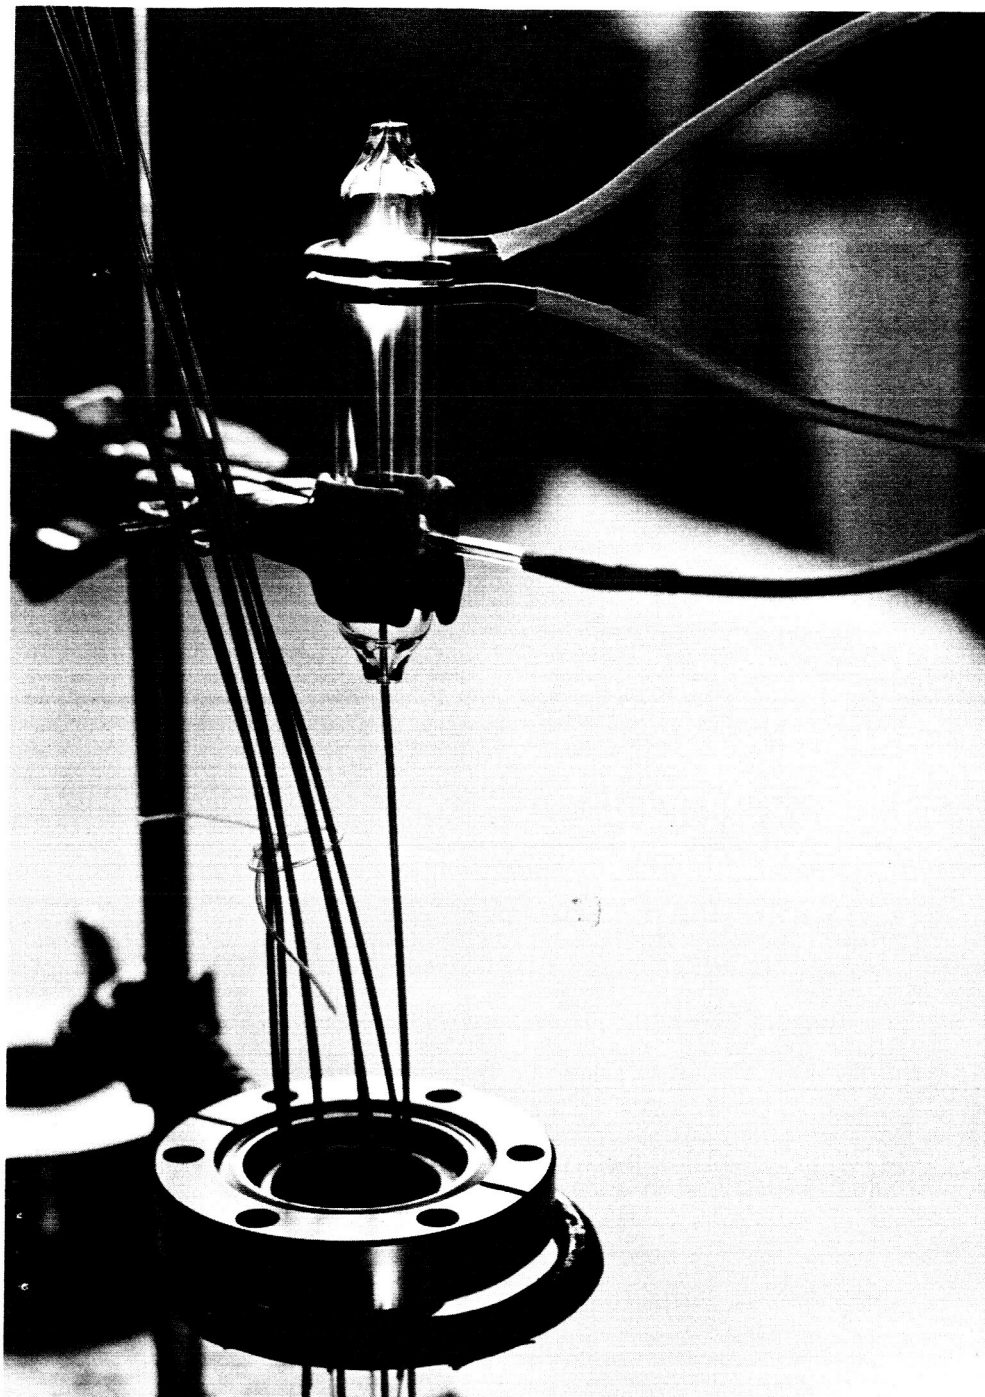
Arrangement for Furnace Thermocouple Feedthrough Brazing
